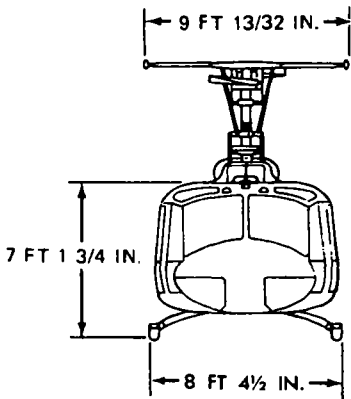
Principal Dimensions, UH-1C (Iroquois)
